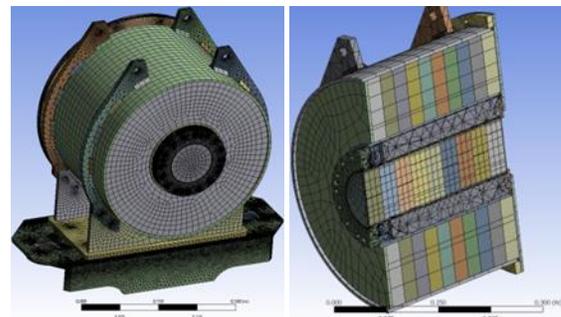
Complete assembly (for installation); Section of operating assembly (MGRS, sleeve and NA)
